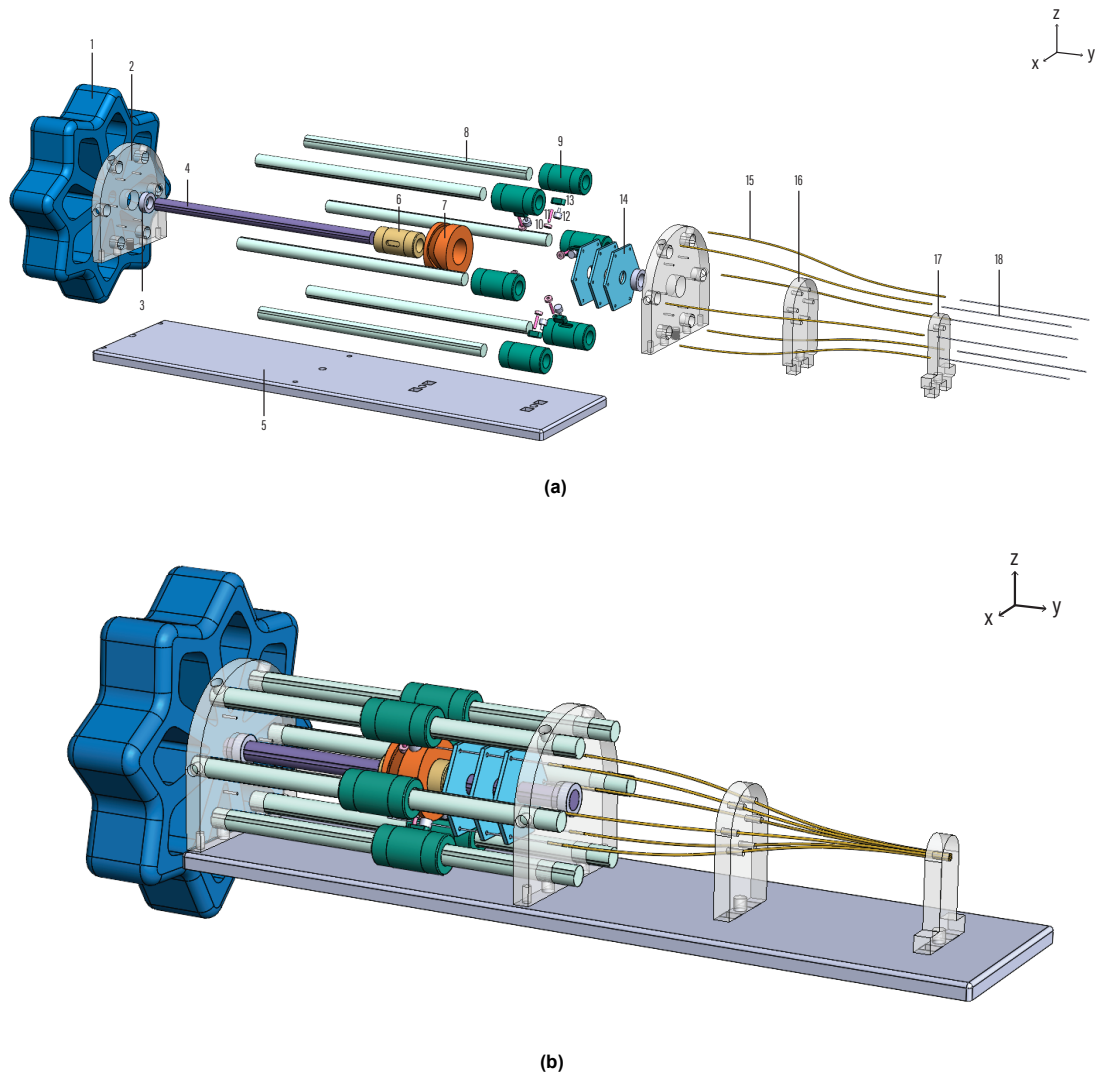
Computer model of the prototype (SolidWorks). (a) Exploded view of the prototype. Knob (1), support block (2), ball bearing (3), inner drive cylinder of the ball spline (4), base plate (5), follower cylinder of the ball spline (6), cam (7), linear guide axis (8), linear guide follower cylinder (9), cam follower (10), follower axis (11), rod holder (12), key (13), origami structure (14), brass tube (15), tube support middle (16), tube support end (17), needle rod (18). (b) The assembled prototype.
